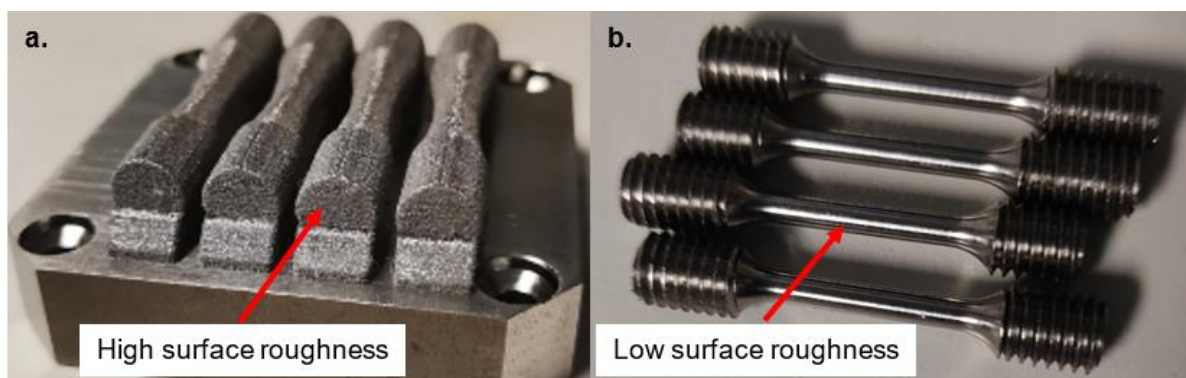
Tensile test specimens in their AB (a) and CNC-milled (b) conditions
